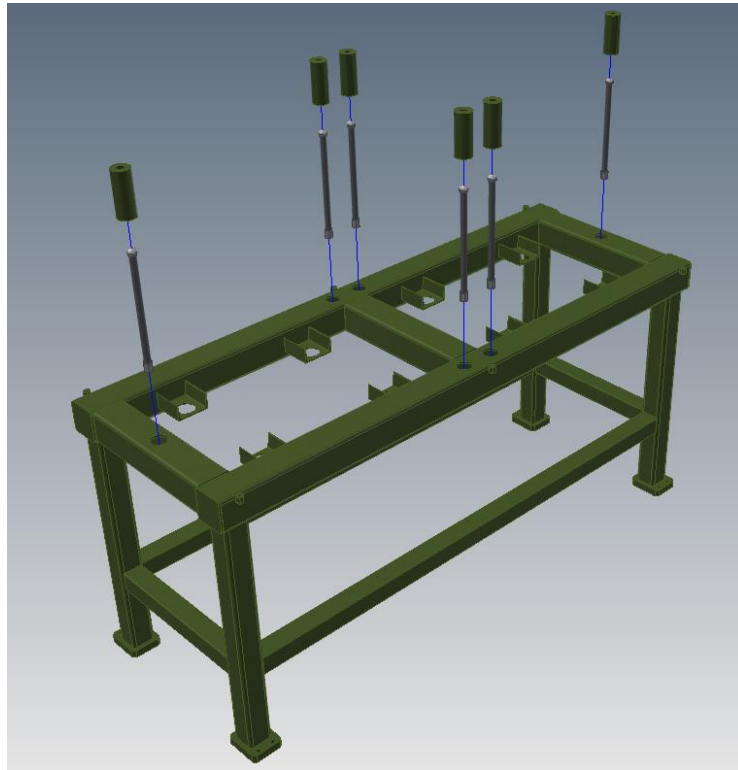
Exploded view of the long steel stand with threaded steel inserts and threaded rods that will hold up the slidable plates.
